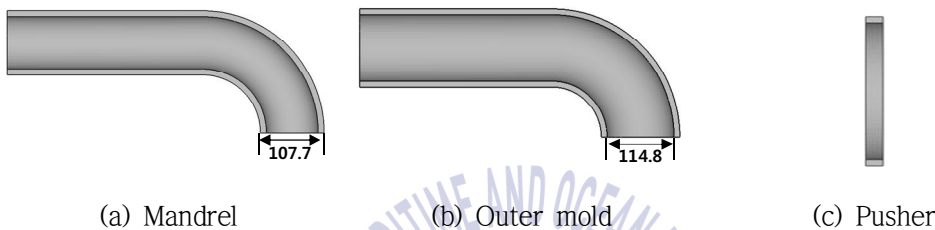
Shape and dimension of dies (model of tolerance 0.25 mm)
